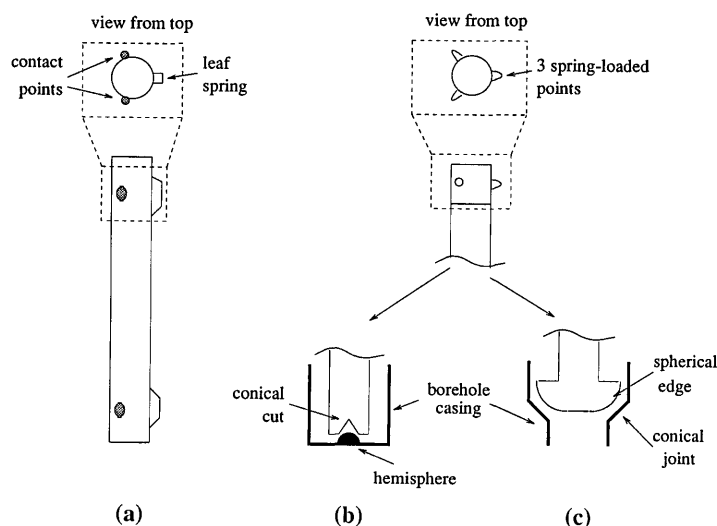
Three different borehole capsule designs. The original design (a) has a set of two contact points and a flat spring located at the top and at the bottom of the capsule. The other designs have three spring loaded pins located at the top of the capsule. The second design (b) centers the bottom of the capsule on the hemisphere in the casing while the third design (c) locates on the conical joint above the instrument compartment.
